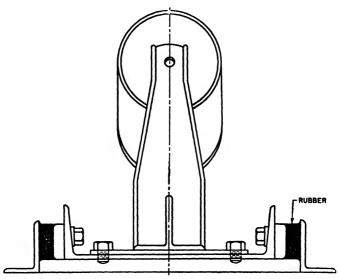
Conveyor-belt idler on rubber impact mountings. The rubber permits the idler to give slightly when subjected to loading shocks, thus protecting belt cover from abrasion, cutting, and gouging. Length of each rubber suspension unit is selected to match load requirements. (See Fig. 13 preceding; also Chap. 10.)
